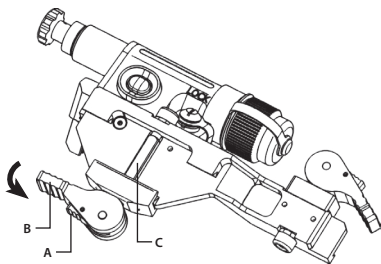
CLAMPING DEVICE ON THE MOUNT UNDERSIDE
